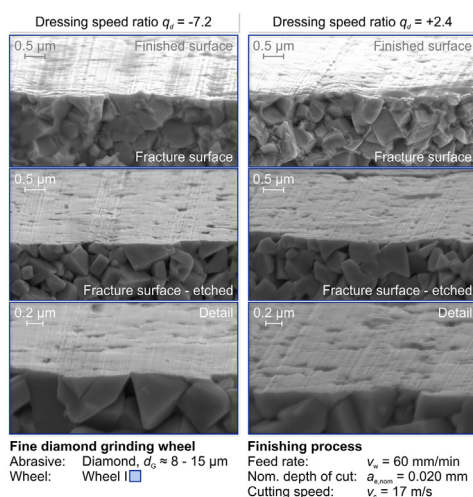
Side view on fracture surfaces of finished cemented carbide surfaces.
